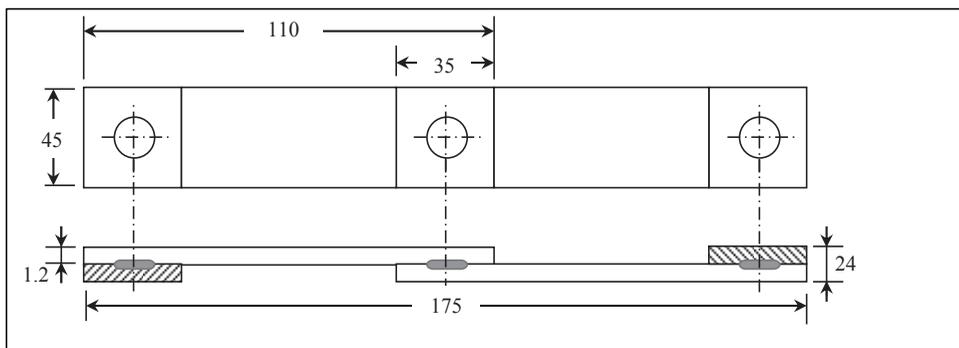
The spot welded sample (Ghazali, Manurung, Mohamed, Mohamed, & Abdullah, 2015)
